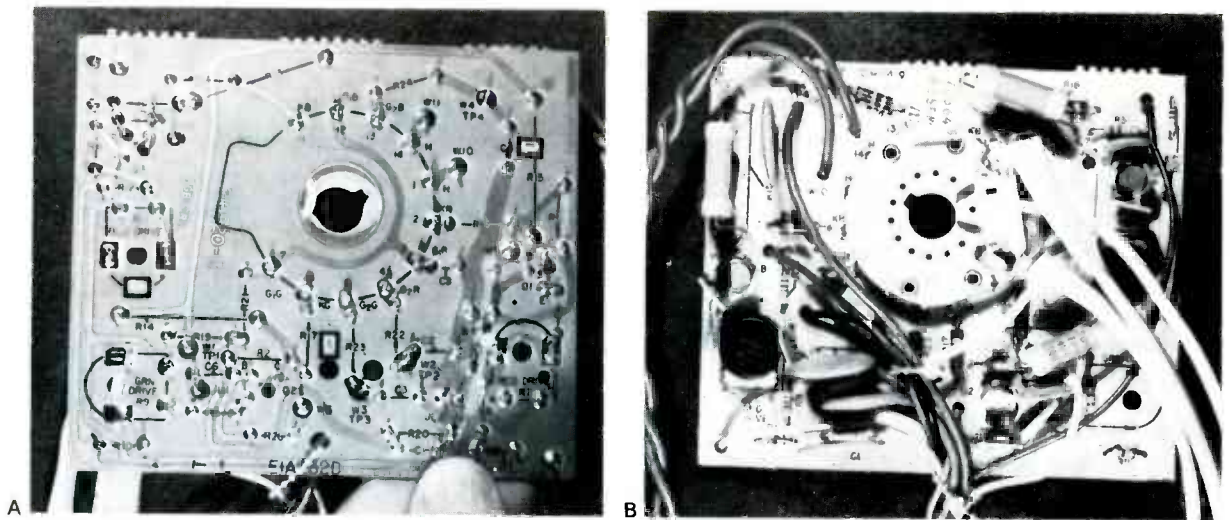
The base socket of the picture tube is fastened to the M113 module, and this "rear" view shows the road-mapping of wiring and components that are mounted on the "front" side (picture A). With
